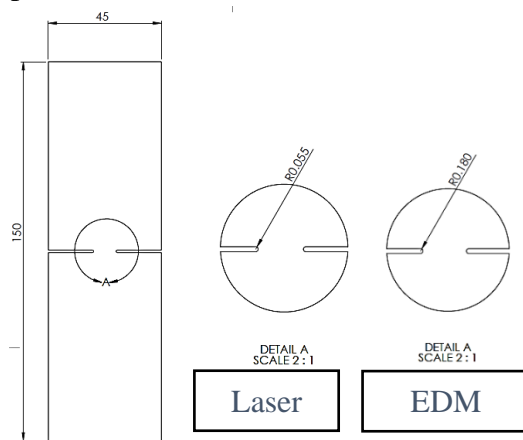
DENT specimen with magnified notch-tip dimensions prepared from laser and EDM cutting.
